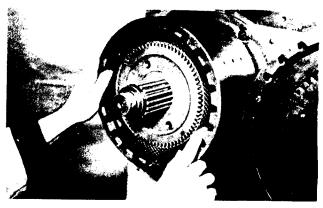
Install one bronze disc on clutch disc hub and against clutch piston.
